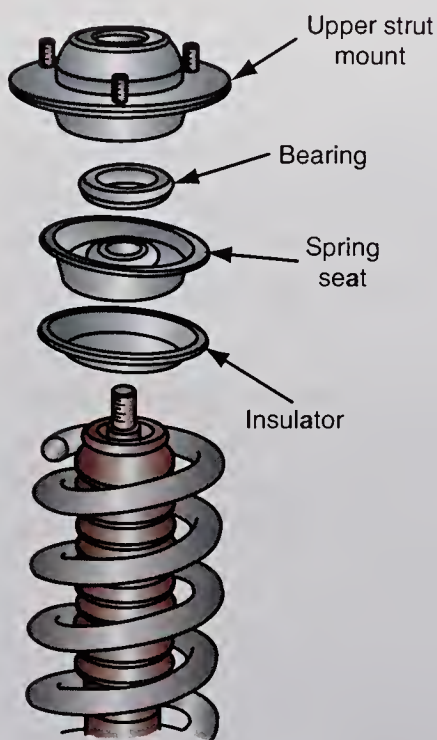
Removal of the upper strut mount, bearing, upper spring seat, and insulator.
